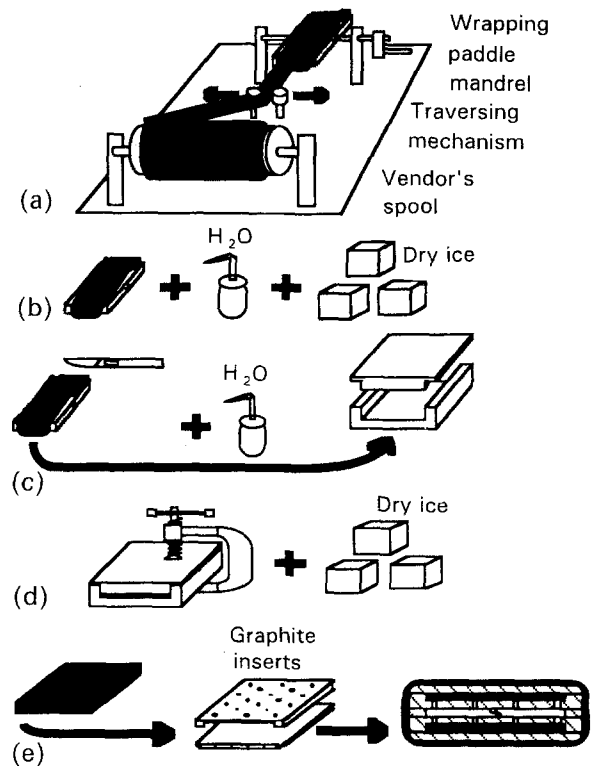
Preform fabrication and mould loading techniques. (a) The fibres are taken from the tow and wrapped onto the mandrel. (b) The wrapped mandrel is doused with water and frozen with dry ice. (c) The fibre preform is cut at the ends of the frozen wrapped mandrel, inserted in the aluminium sizing-press, thawed, compressed to 55 v/o fraction; and (d) refrozen into a cryopacked preform. (e). Two cryopacked preforms are then loaded into the mould and weld sealed for preheating, outgassing and pressure infiltration.
